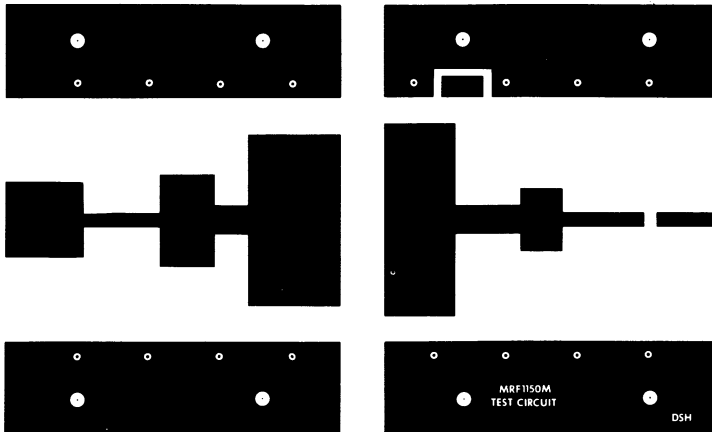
PRINTED CIRCUIT BOARD LAYOUT — 1090 MHz TEST CIRCUIT
